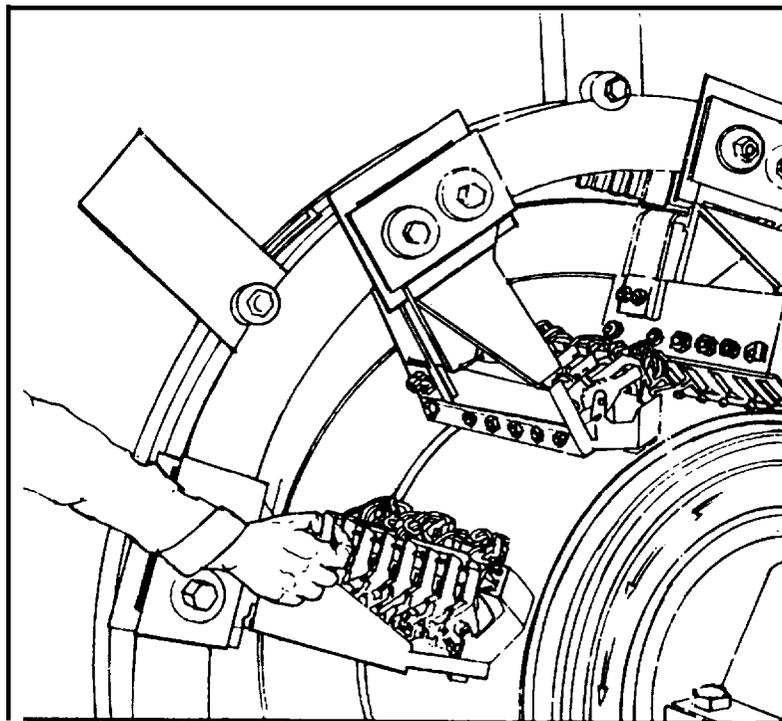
Inspecting and installing brushes on a large DC motor.
